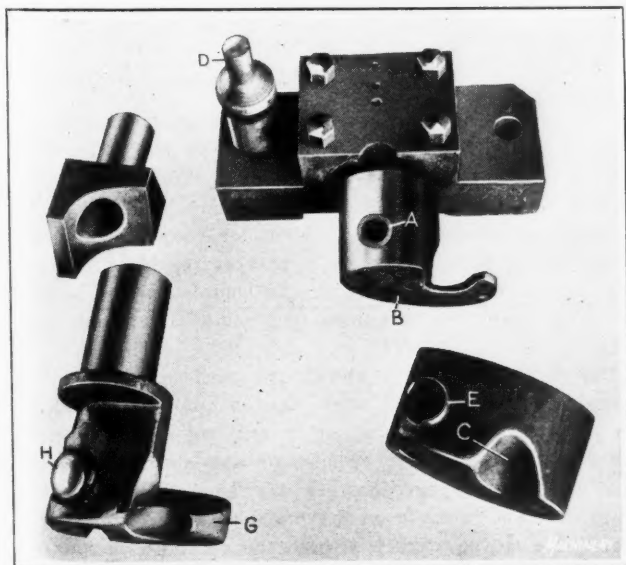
Punches and Dies used to punch the Side Hole and to draw up the Flange which surrounds this Hole
